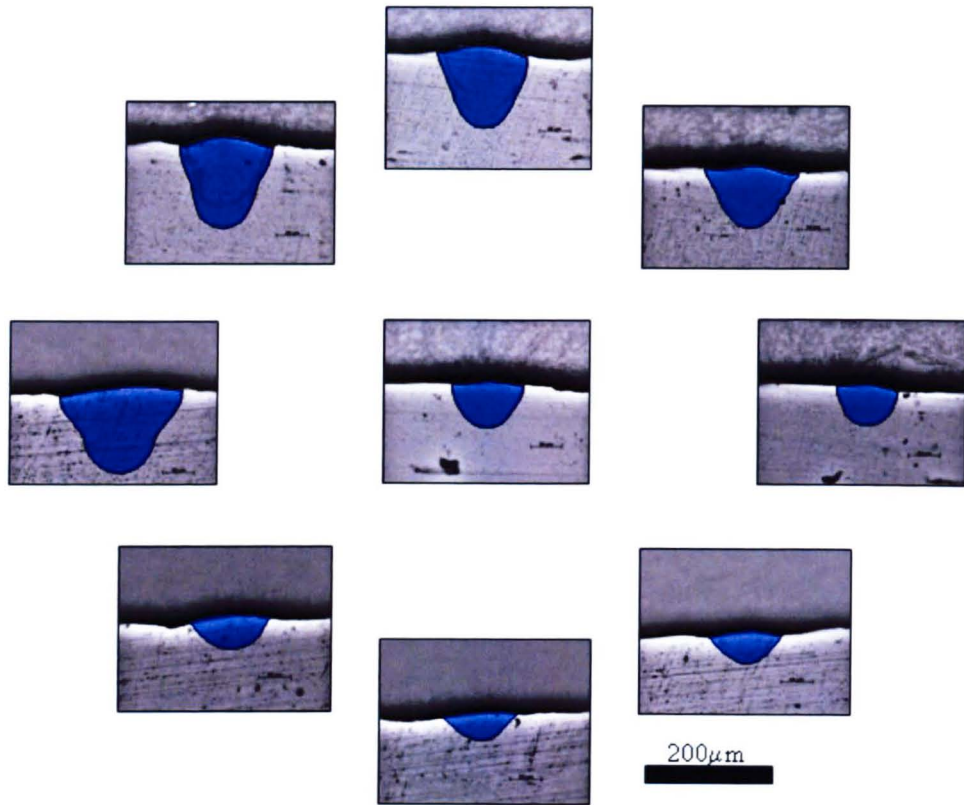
Cross-section of weld tracks highlighted in blue for BE=0 set out in the CCD array
